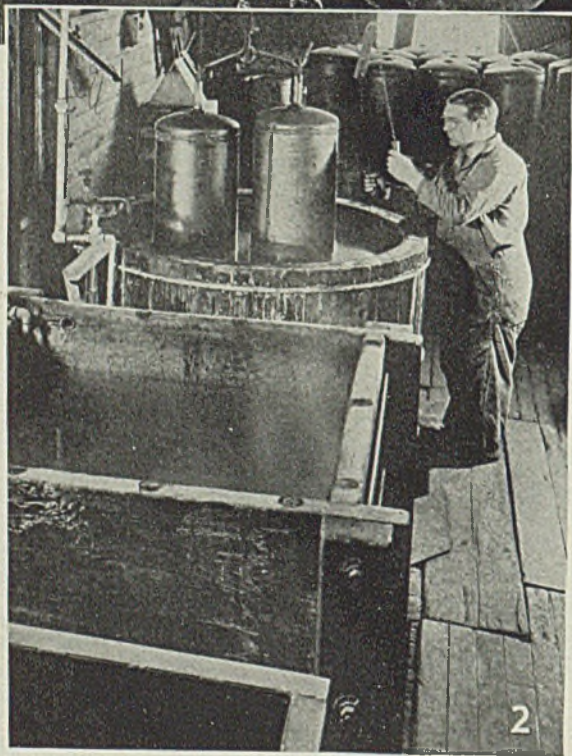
After welding, welds are ground down flush. Then tanks are pickled and rinsed in the series of vats shown here. Tanks are handled by means of plug fixtures screwed in the top, these connecting to a double-hook lift, moved by an overhead electric hoist operating on a monorail
